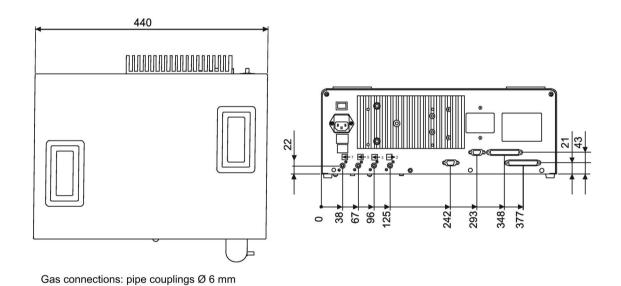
ULTRAMAT 23, dimensions of bench-top unit
